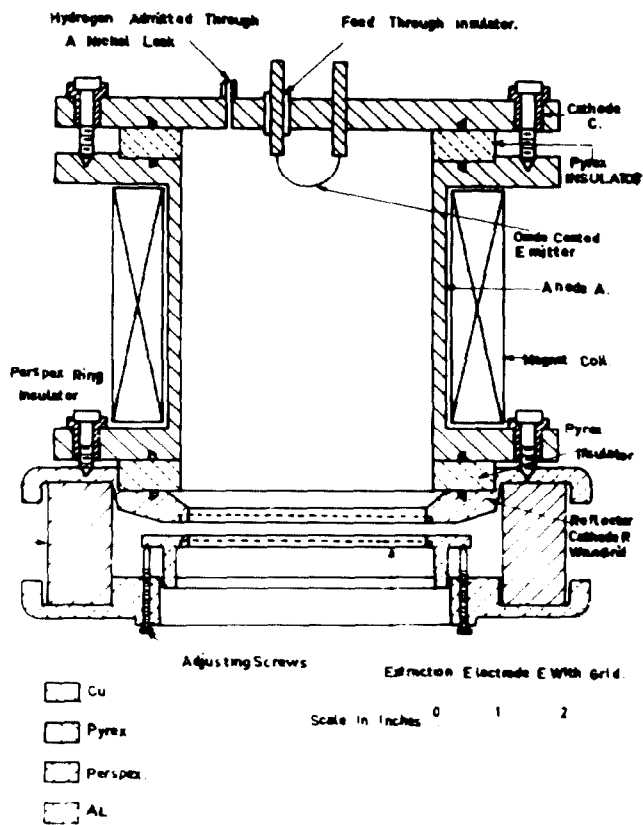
A Cross-Sectional View of the P.I.G. Ion Source Assembly.
